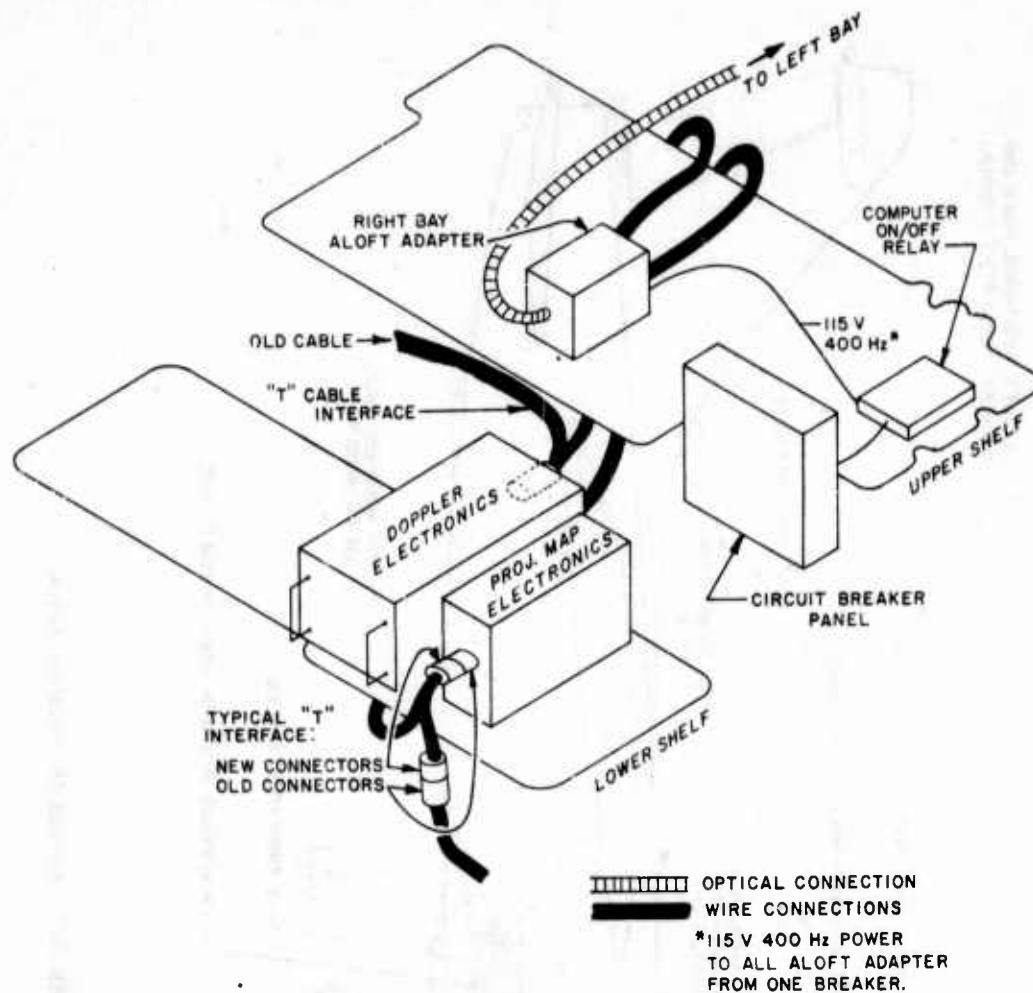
Right Bay Area Adapter Location and Mounting.
